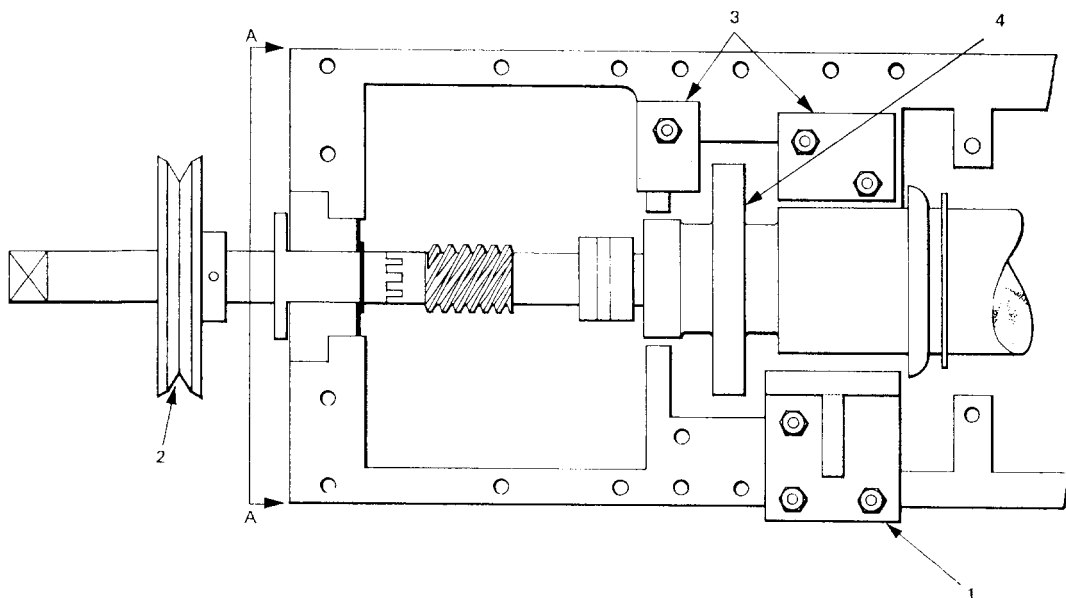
PLAN OF ROTOR SHAFT AND BEARING HOUSING
